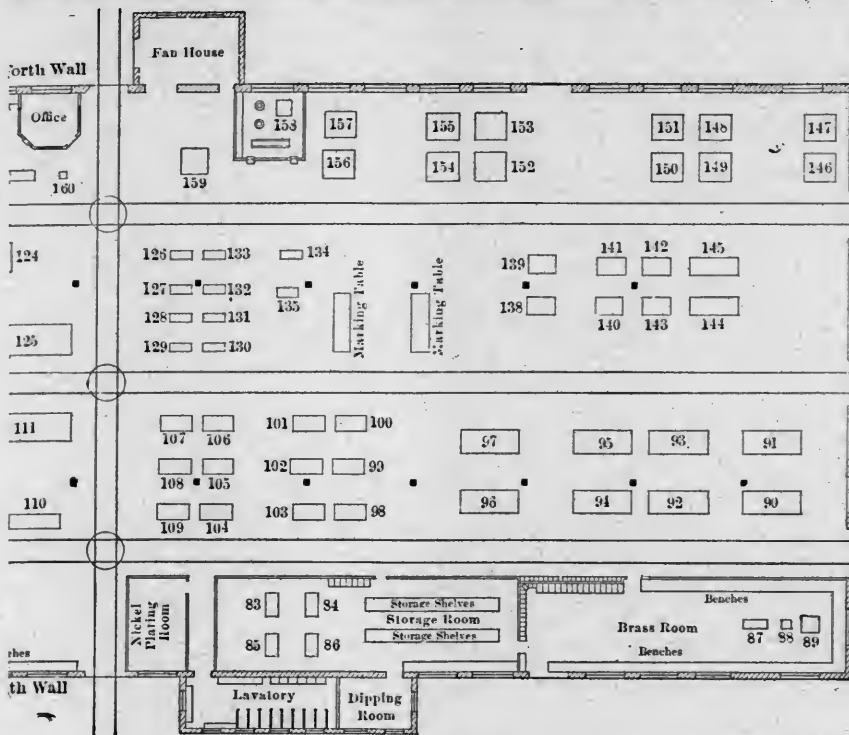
PARTIAL PLAN OF THE CAR MACHINE SHOP.
